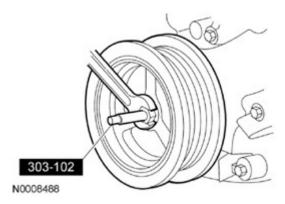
Locating Crankshaft Pulley Sealing Area Courtesy of FORD MOTOR CO.
